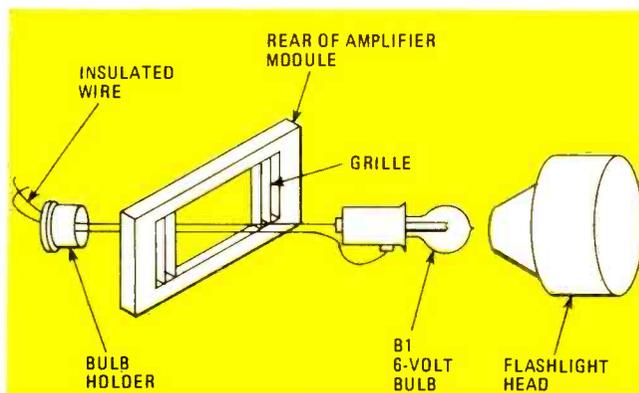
FLASHLIGHT HEAD assembly to the rear of the amplifier case is diagrammed here. Of course, position is not important here and you do what is best for your needs. You may opt for a bracket attachment or pistol-pointing device.
